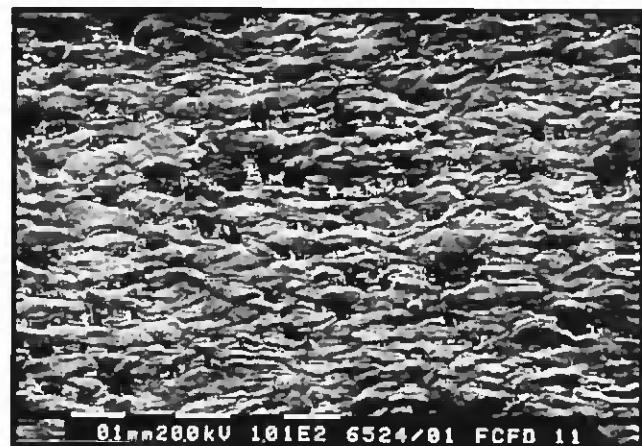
Weld interface surface after fracture, cold roll welding steel-steel with one-sided electroless Ni plating (FCFD),  $Y = 0.612$ .
